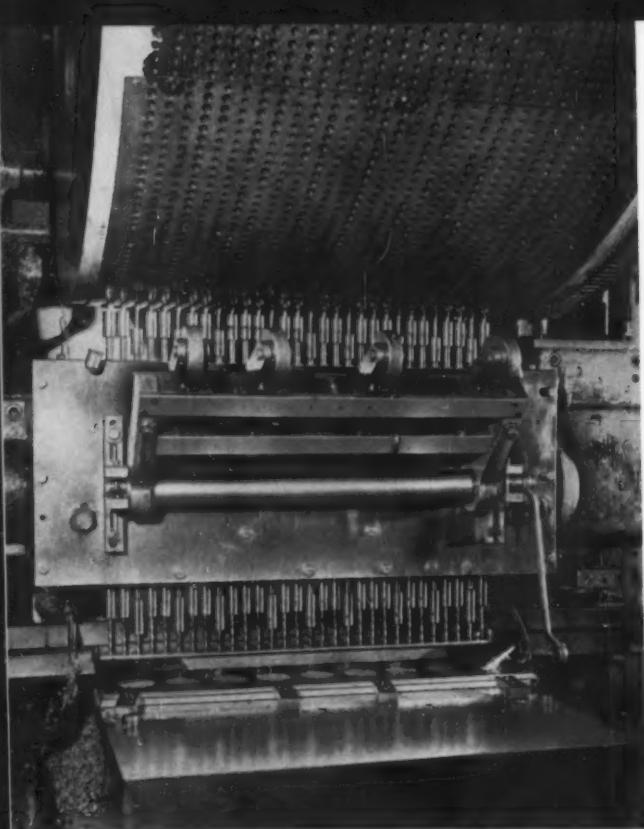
Thirty drill spindles are aligned beneath the drum type spindle selector of the unique drilling machine shown in the heading illustration. A total of 5400 holes, grouped in patterns, can be drilled through stacked plates in three minutes.
